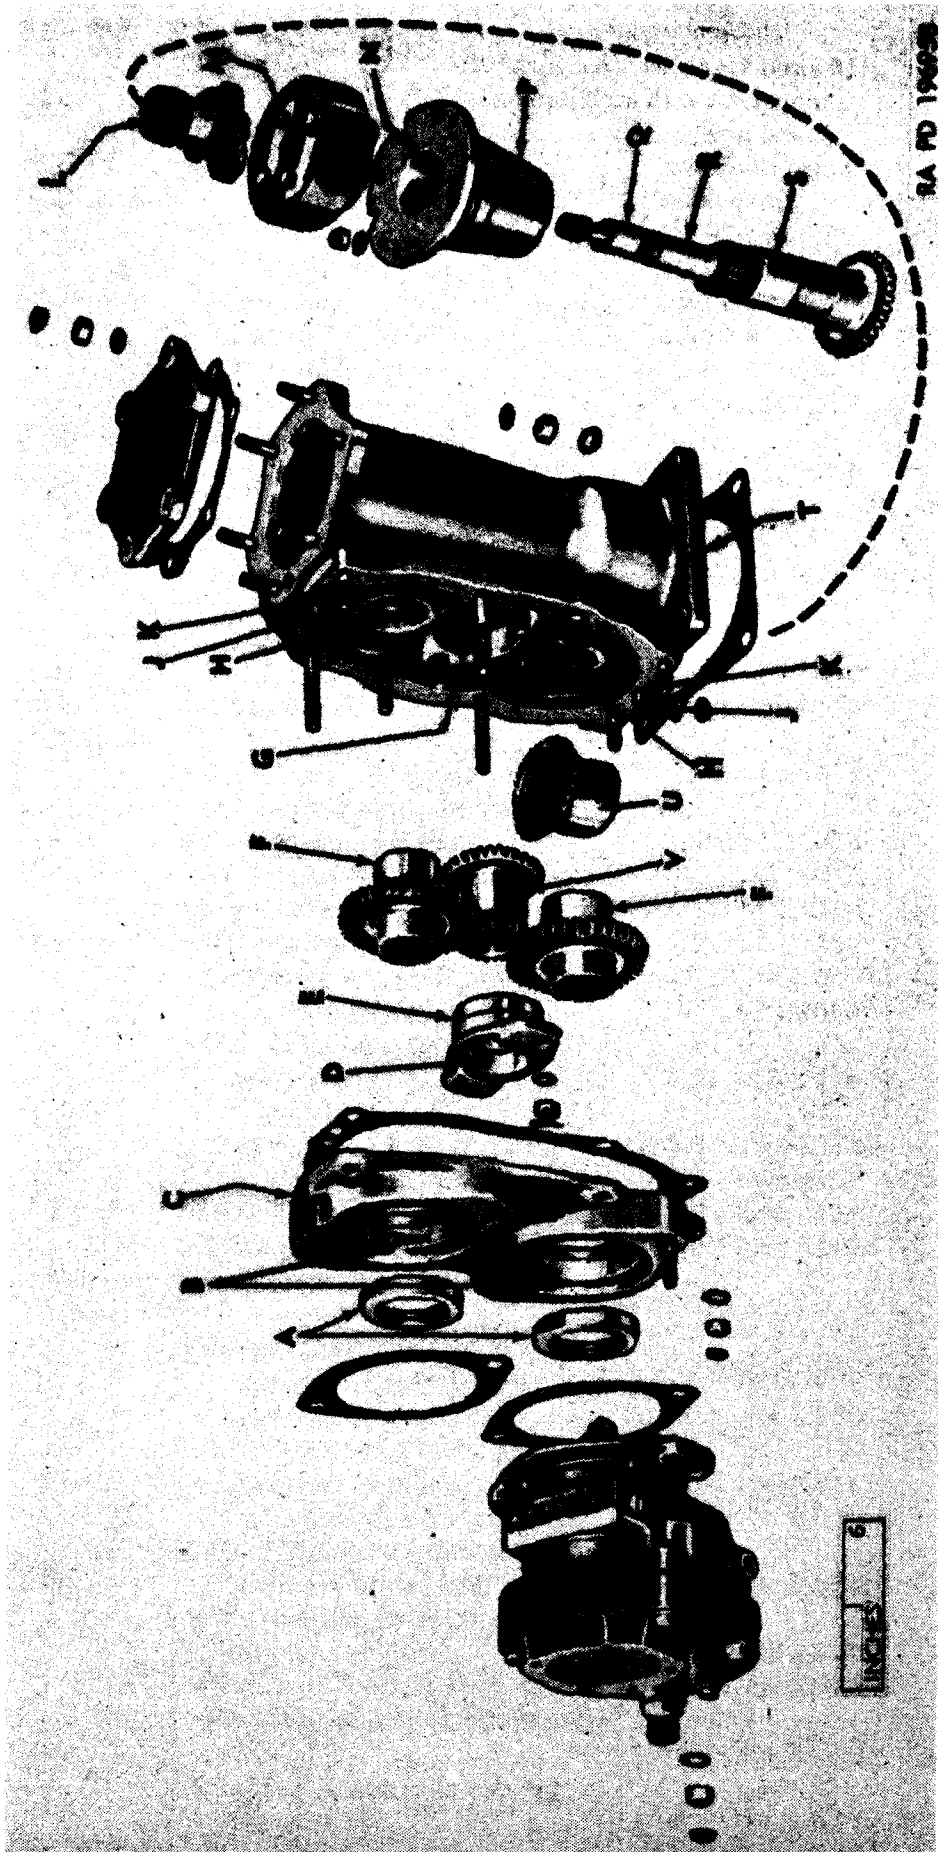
Repair and rebuild standard points of measurement for magneto drive housing assembly.
